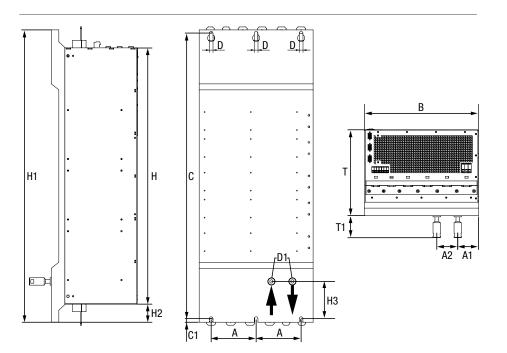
Dimensional drawing of housing with liquid cooling, schematic representation for BG7
